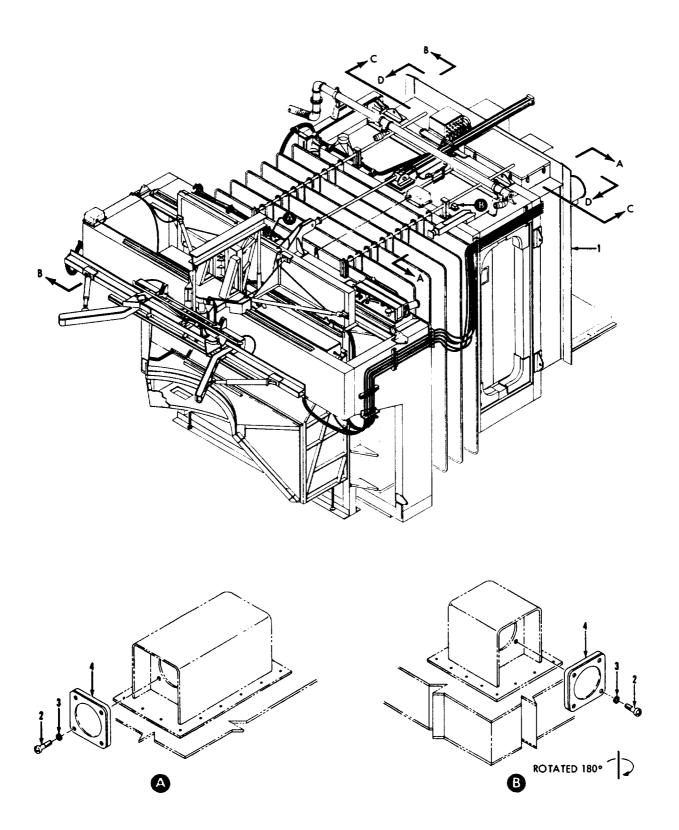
Equipment Installation (Sheet 1 of 25)
